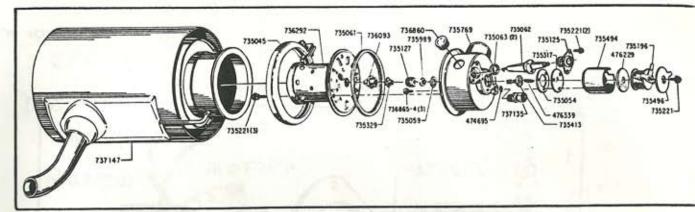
BURNER & EXCHANGER ASSEMBLY 737142-1
